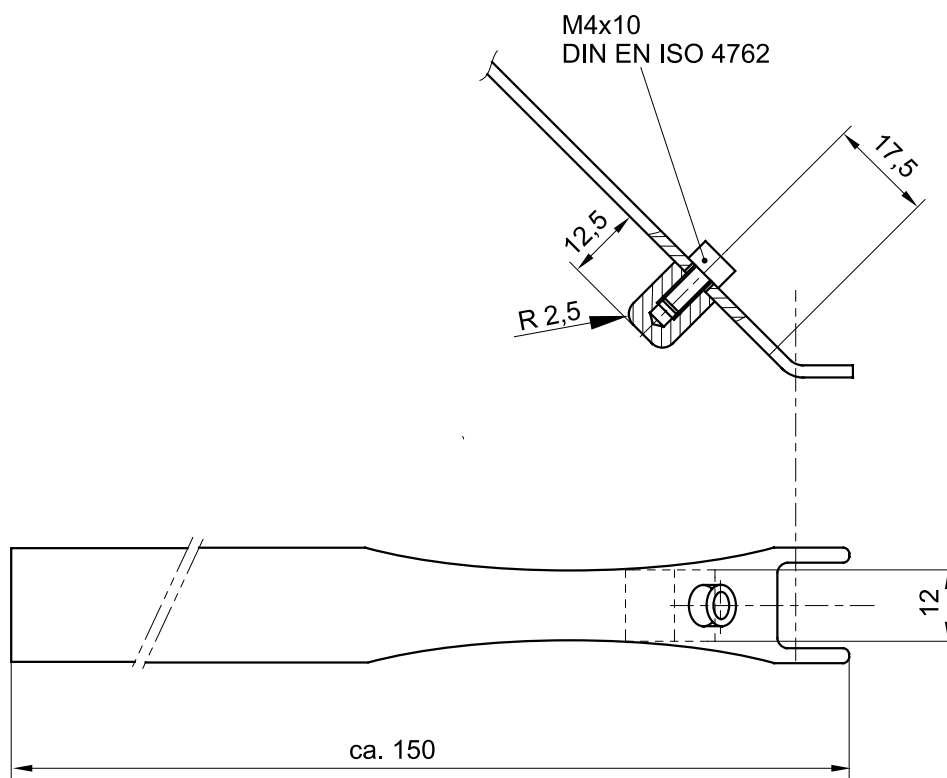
Tool for Detachating the Cable Plugs from the Solenoid Coils
